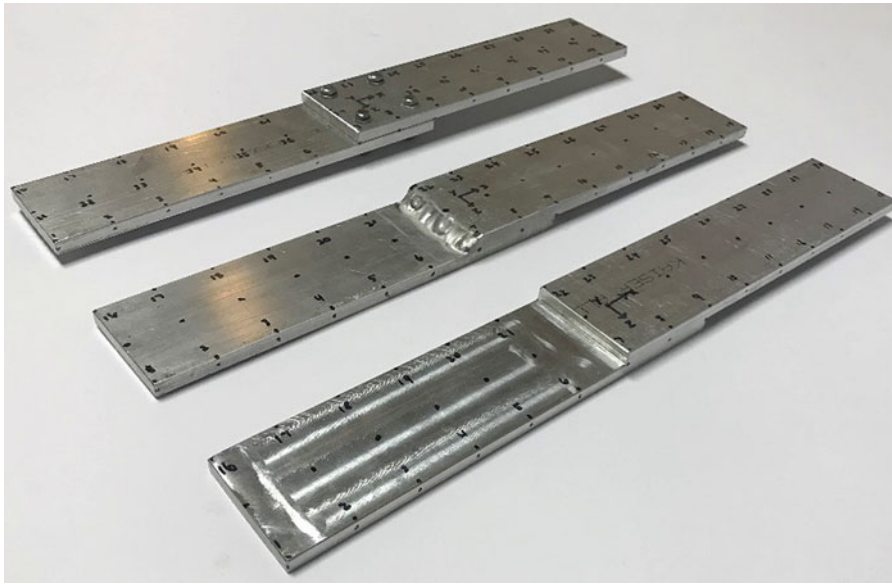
Solid, welded, and bolted lap joint structures (front to rear, respectively) used for experimental analysis
